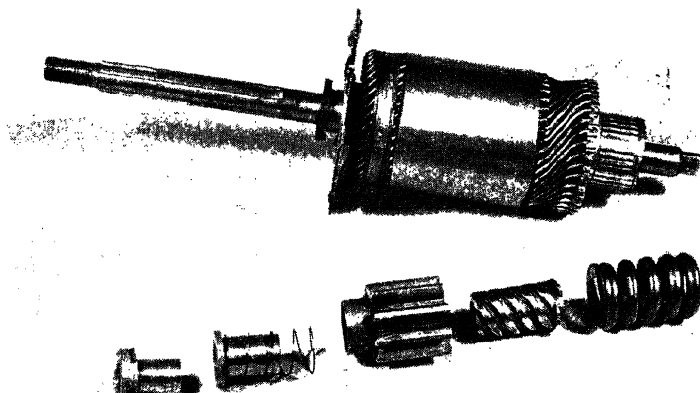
REMOVING THE ARMATURE FROM THE STARTER MOTOR
